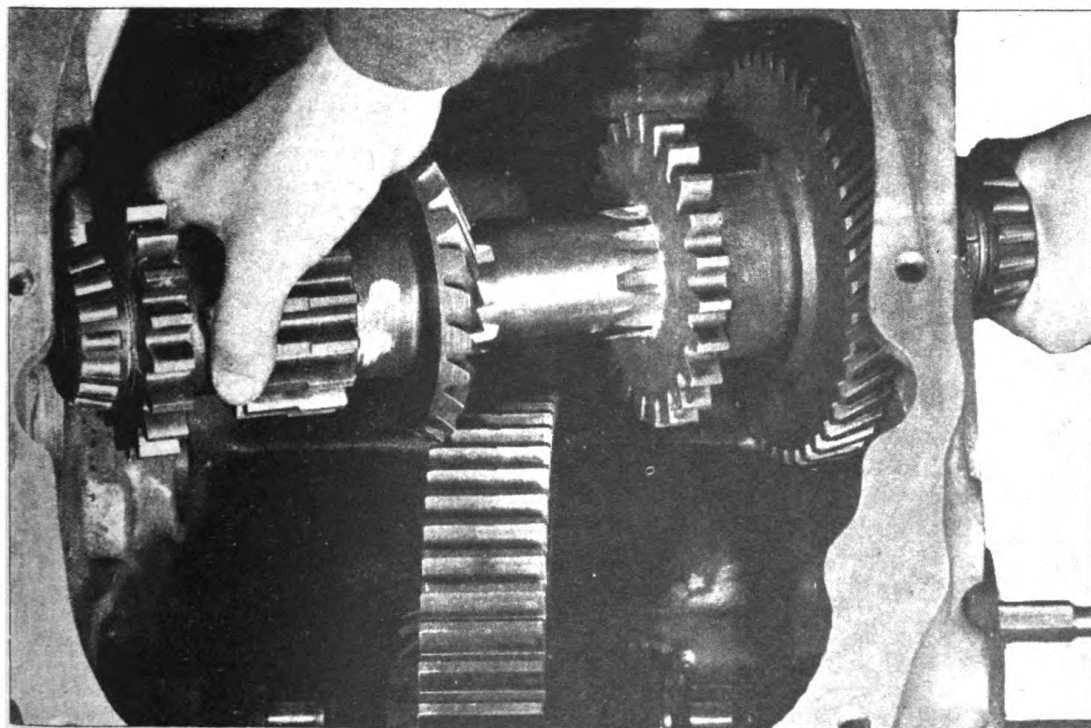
Removing First Reduction Shaft Complete with Gears and Bearings
